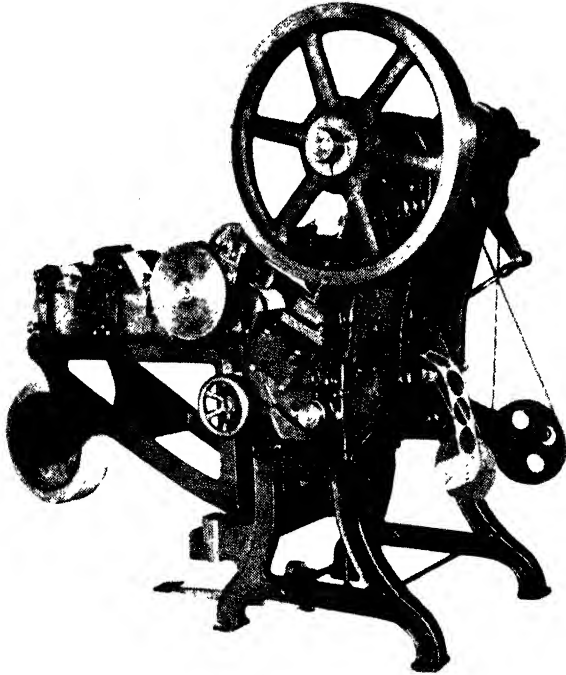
A paper cap blanking and drawing press, specially fitted with paper dipping stations.
